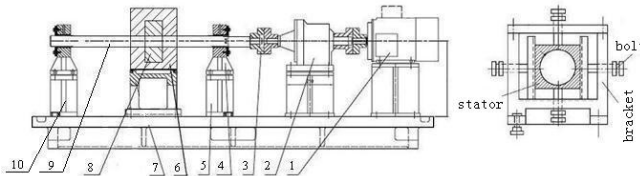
Test bed of the Rotor friction Acoustic Emission. 1- electromotor ; 2-accelerate box ; 3- shaft joint ; 4- bearing ; 5- bearing base 1 ; 6- rub-impact set ; 7- base ; 8- turntable ; 9- axle ; 10- bearing base 2.
